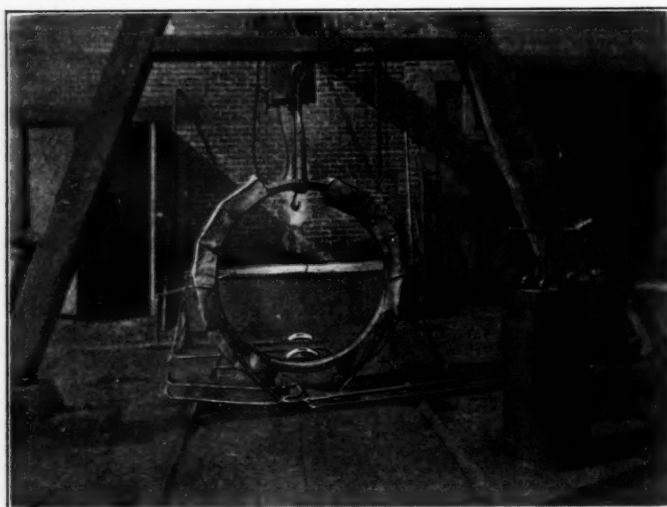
Apparatus for Heating and Mounting Driving Wheel Tires.
